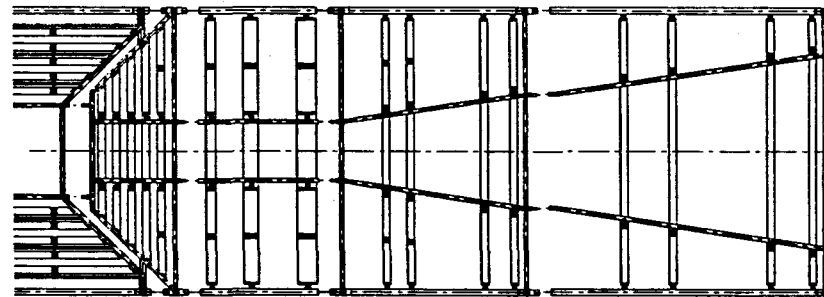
Schematic drawing of pieces from which the detector is assembled.
